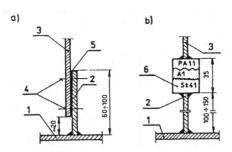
Construction of the union between the superstructure and deck.(a - Rivetted joint, b - Welded joint) 1-Deck, 2-Metallic flat bar,3-Aluminium alloy (PA11) shell plates, 4-Rivets, 5-Insulating separator, 6-Connector St41+Al+Pa11.
